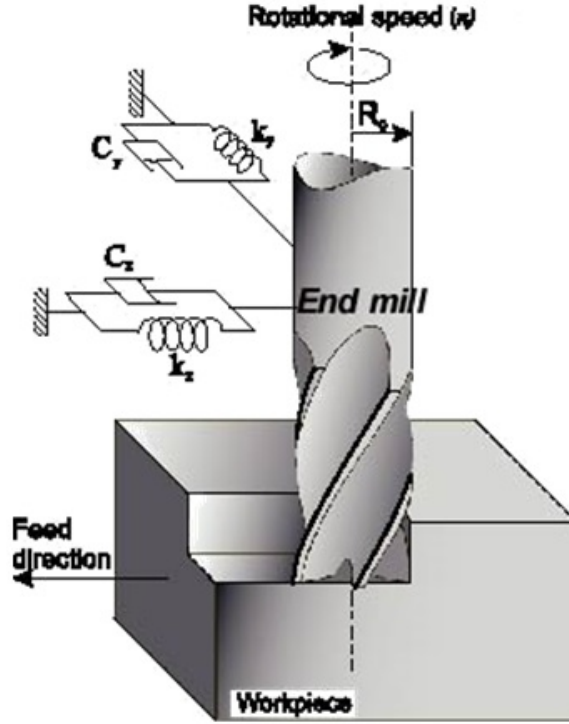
Schematic Representation of End Mill Cutter in Milling Operation
